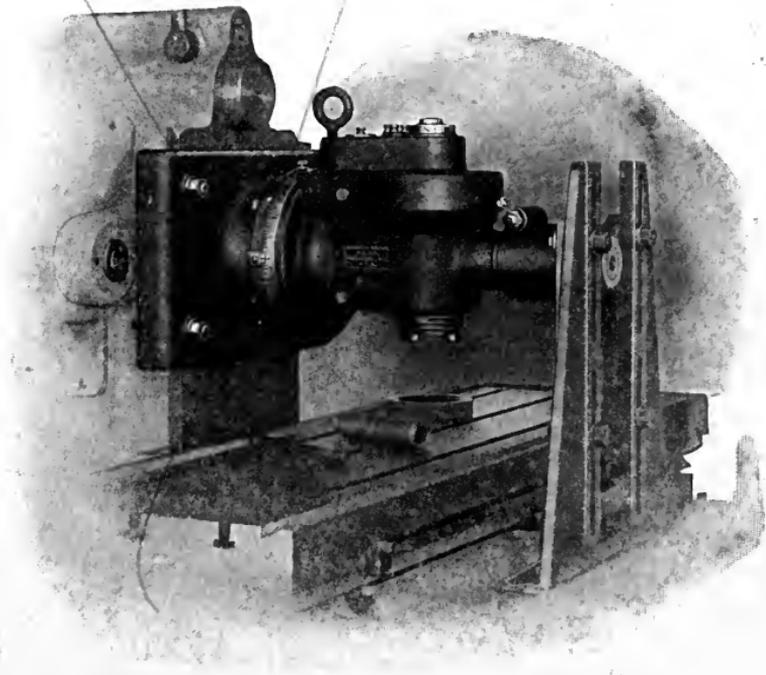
Vertical Milling Head Attached to Horizontal Milling Machine
